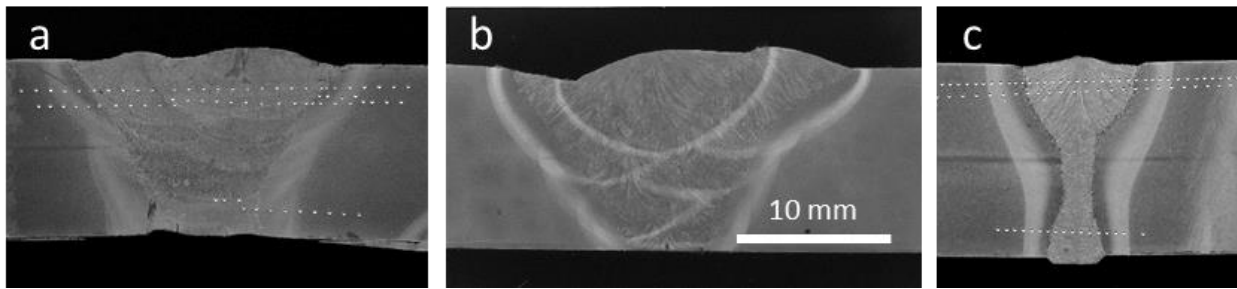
Cross sections of a) MMA weld with 10 beads, b) GMAW weld with solid wire using 7 beads and c) single pass Laser-Hybrid weld in 12 mm Weldox 1100. Hardness indentations can be seen in a) and c).
